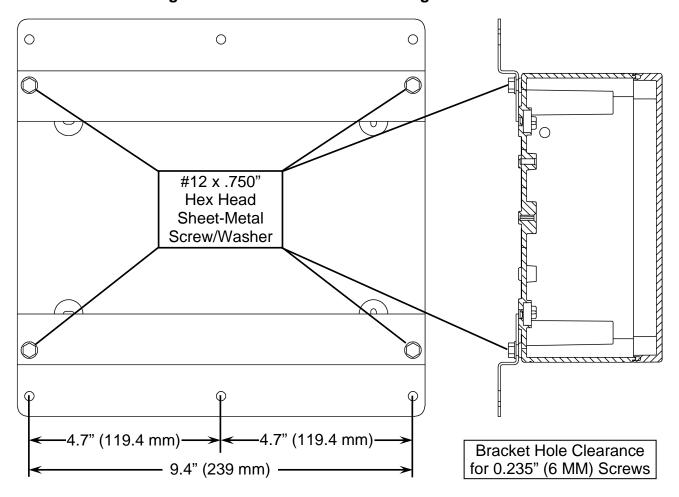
SmartCAN6, SmartCAN8, and SmartCAN10 Mounting Dimensions
